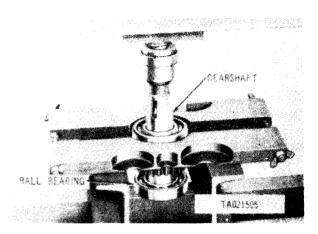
Pressing starter driven gearshaft from ball bearing.
